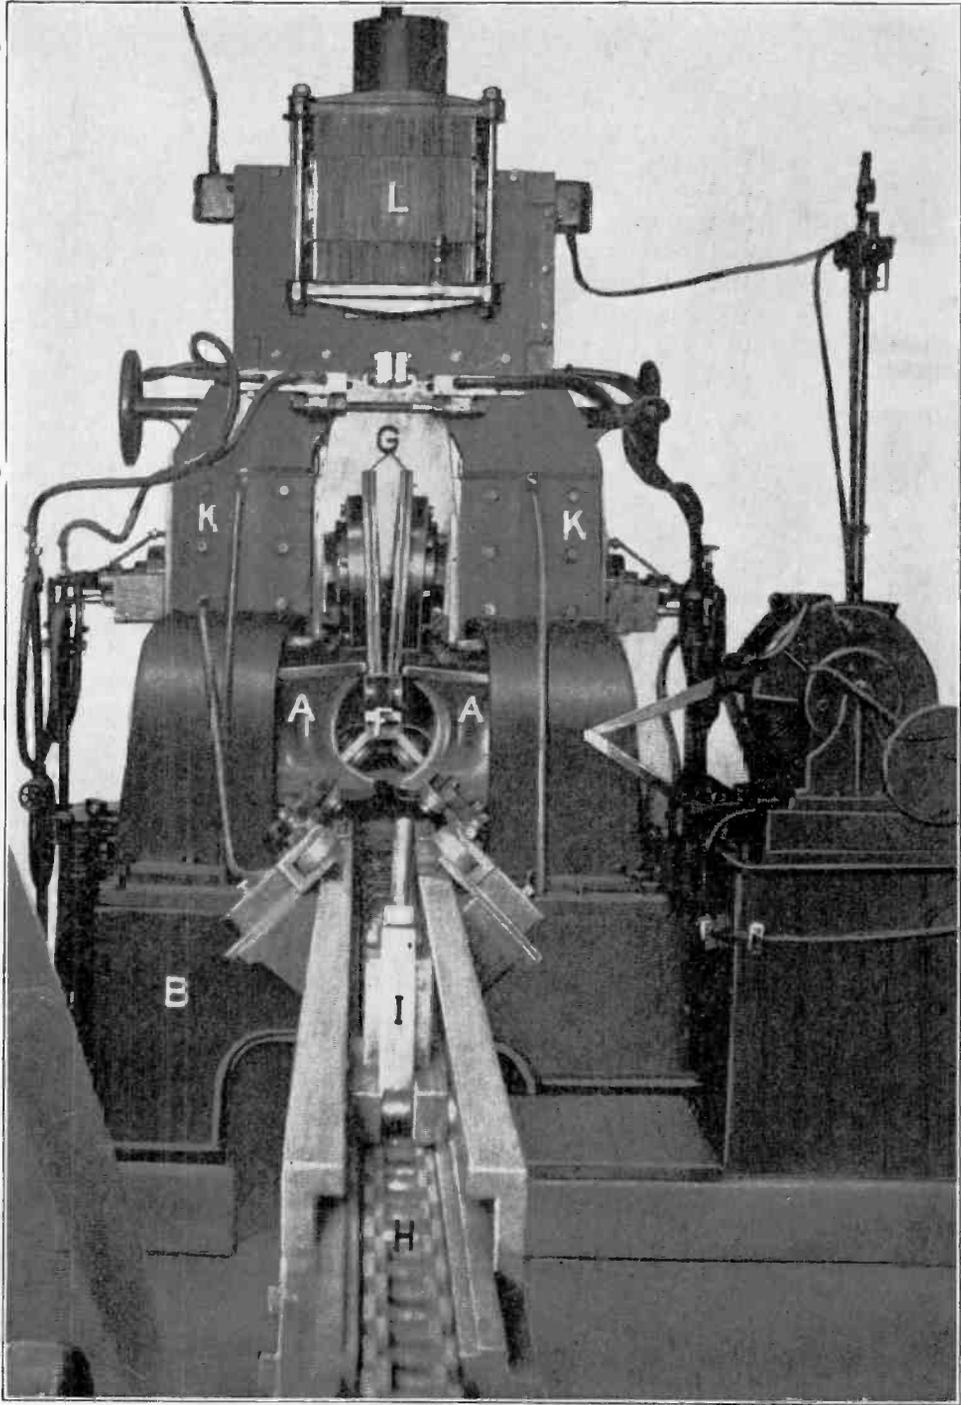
Rear View of Electric-Welding Machine.
